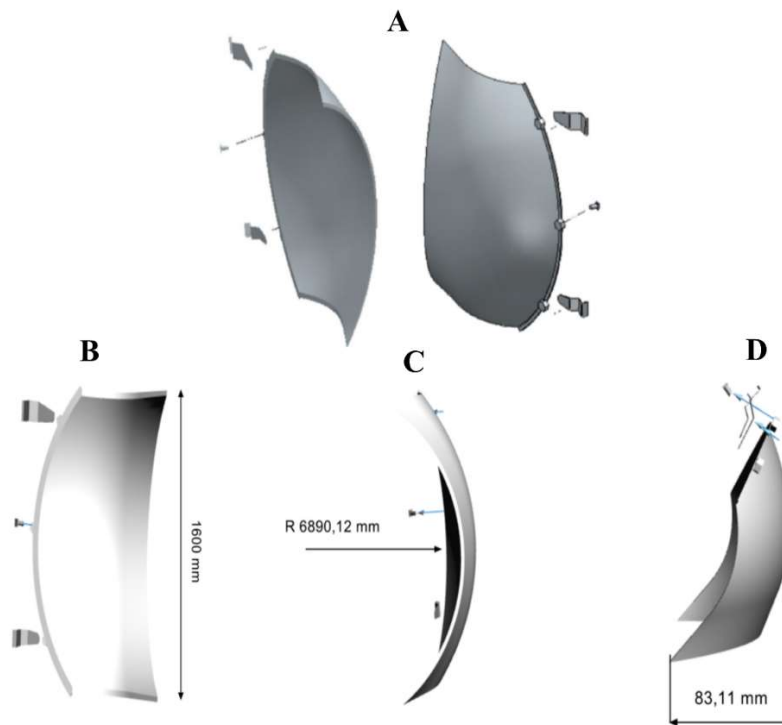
General view with explosion (A), and without explosion on the parts in the front (B), side (C) and auxiliary (D) views of the deflector.
